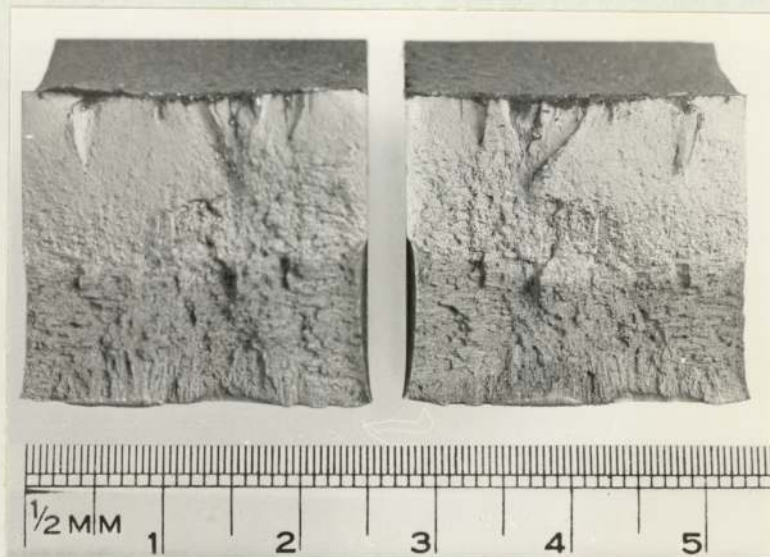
Material A Cast Specimen Fracture Surface.
